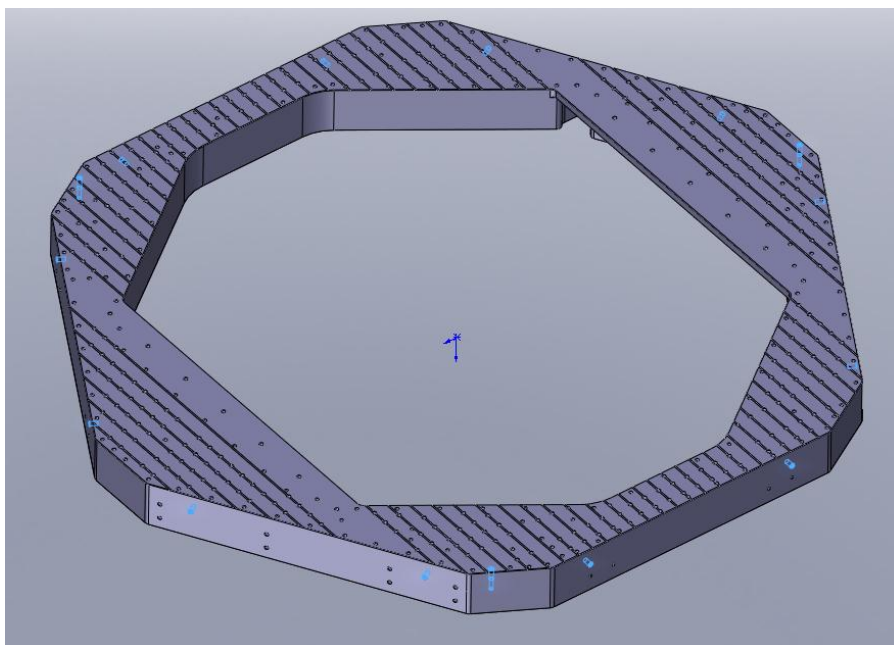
D0900894 Bottom Part of Stage 0 with the top and side lifting holes highlighted in blue
